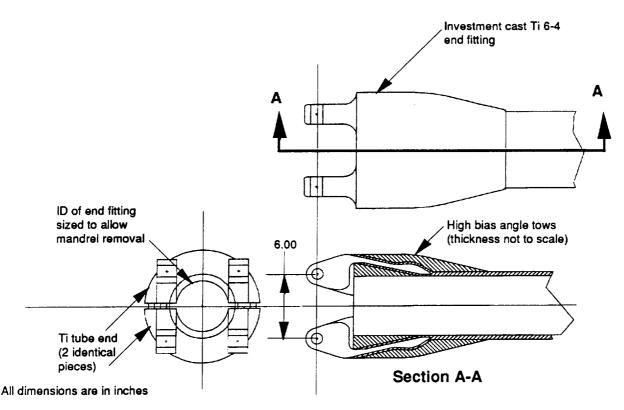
Tube End Attachment (2-piece Ti ends integrally wound onto Gr/Ep tube)
